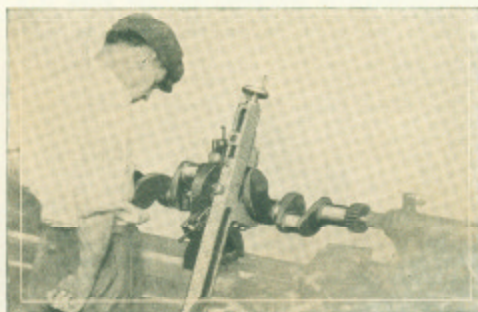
Truing Crankshaft Throw Bearings with a Weber Tool Attachment
